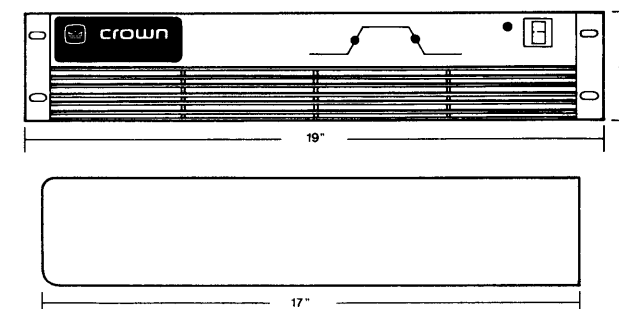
Micro-Tech 1000 Mounting Dimensions
